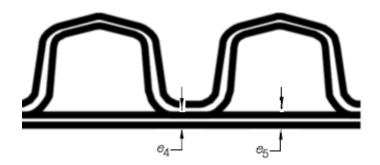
STORMPRO® AND SEWERPRO® TYPICAL CROSS SECTION
